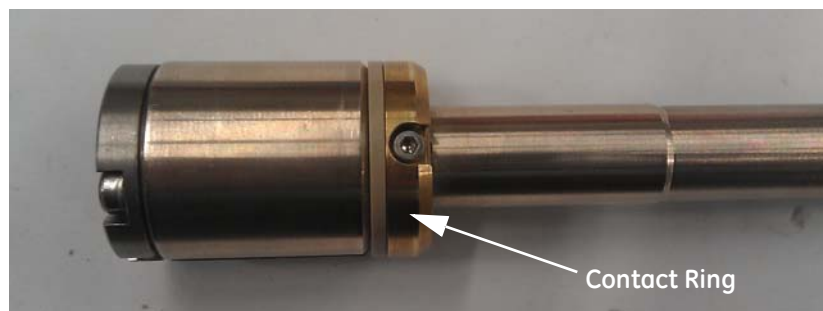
Installation of the Contact Ring onto the Actuating Shaft
